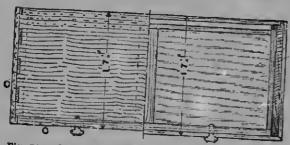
Half Plan and Section of Drawer Pedestal of Combination Wardrobe Bedstead.
